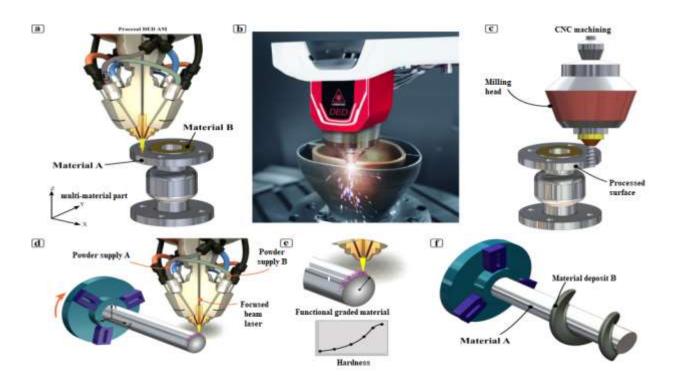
Hybrid AM system combining DED and CNC machining processes: (a) multi-material part manufacturing using DED process, (b) multi-material heat exchanger manufactured by Lasertec 125 by DMG MORI, (c) CNC machining process to increase surface quality of the part, (d) performing the DED process on the shaft to fabricate functionally graded material, (e) FGM fabricated part with different hardness properties, (f) depositing a second material during the turning process, [5]
